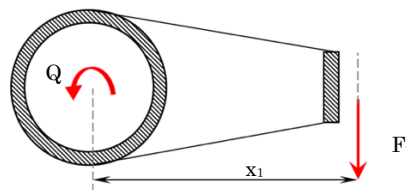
Circular weld must handle  $Q$  and the weld for the sleeve must handle  $F_t$ .
